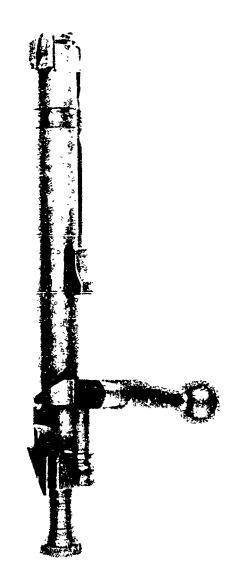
Springfield 1903 Bolt Assemblies - Assembled view
